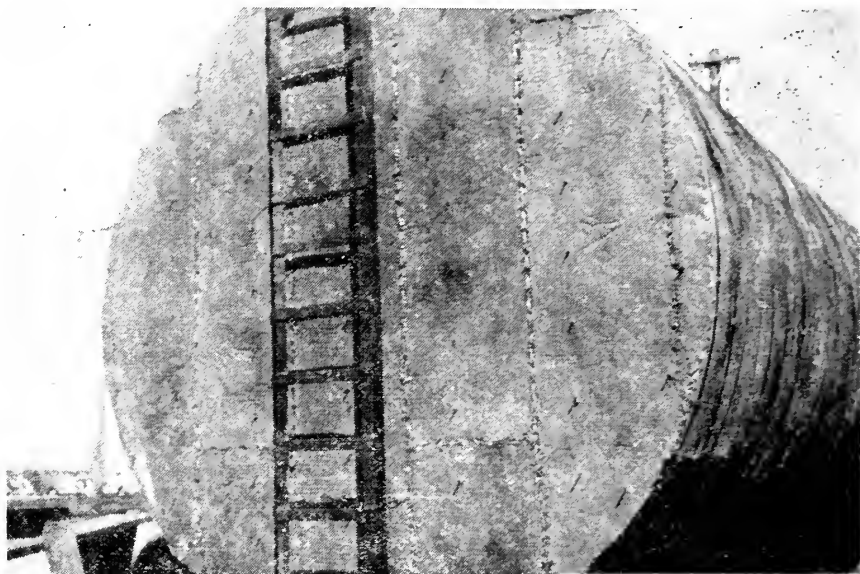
Fuel tank covered with fiber glass held in place with circumferential bands and studs welded to the head.
